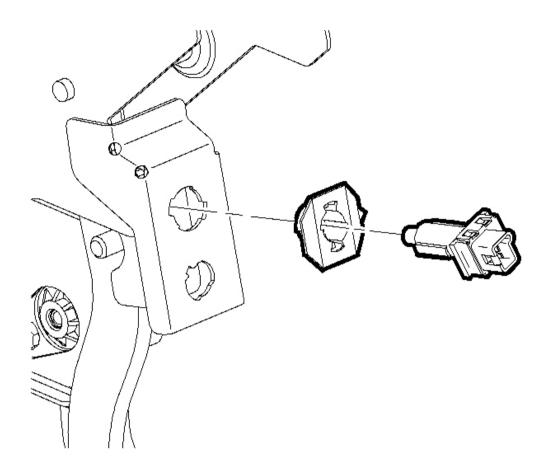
Removing/Installing Cruise Control Release Switch Courtesy of GENERAL MOTORS CORP.
